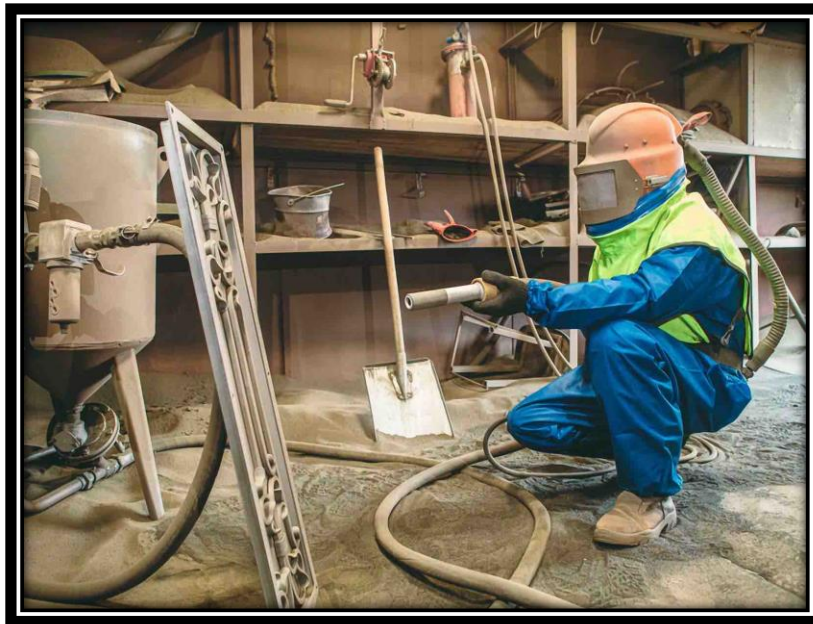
Sandblasting dust control (GRT engineering technology company, 2022)
